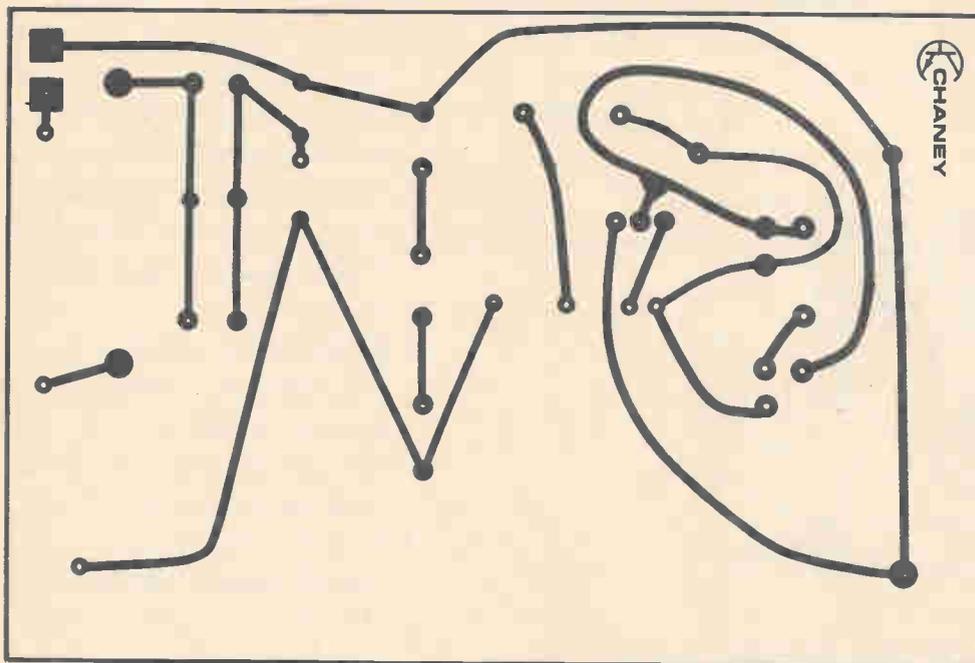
You can use this full-size foil pattern to etch your own printed-circuit board, or to check your solder traces.
